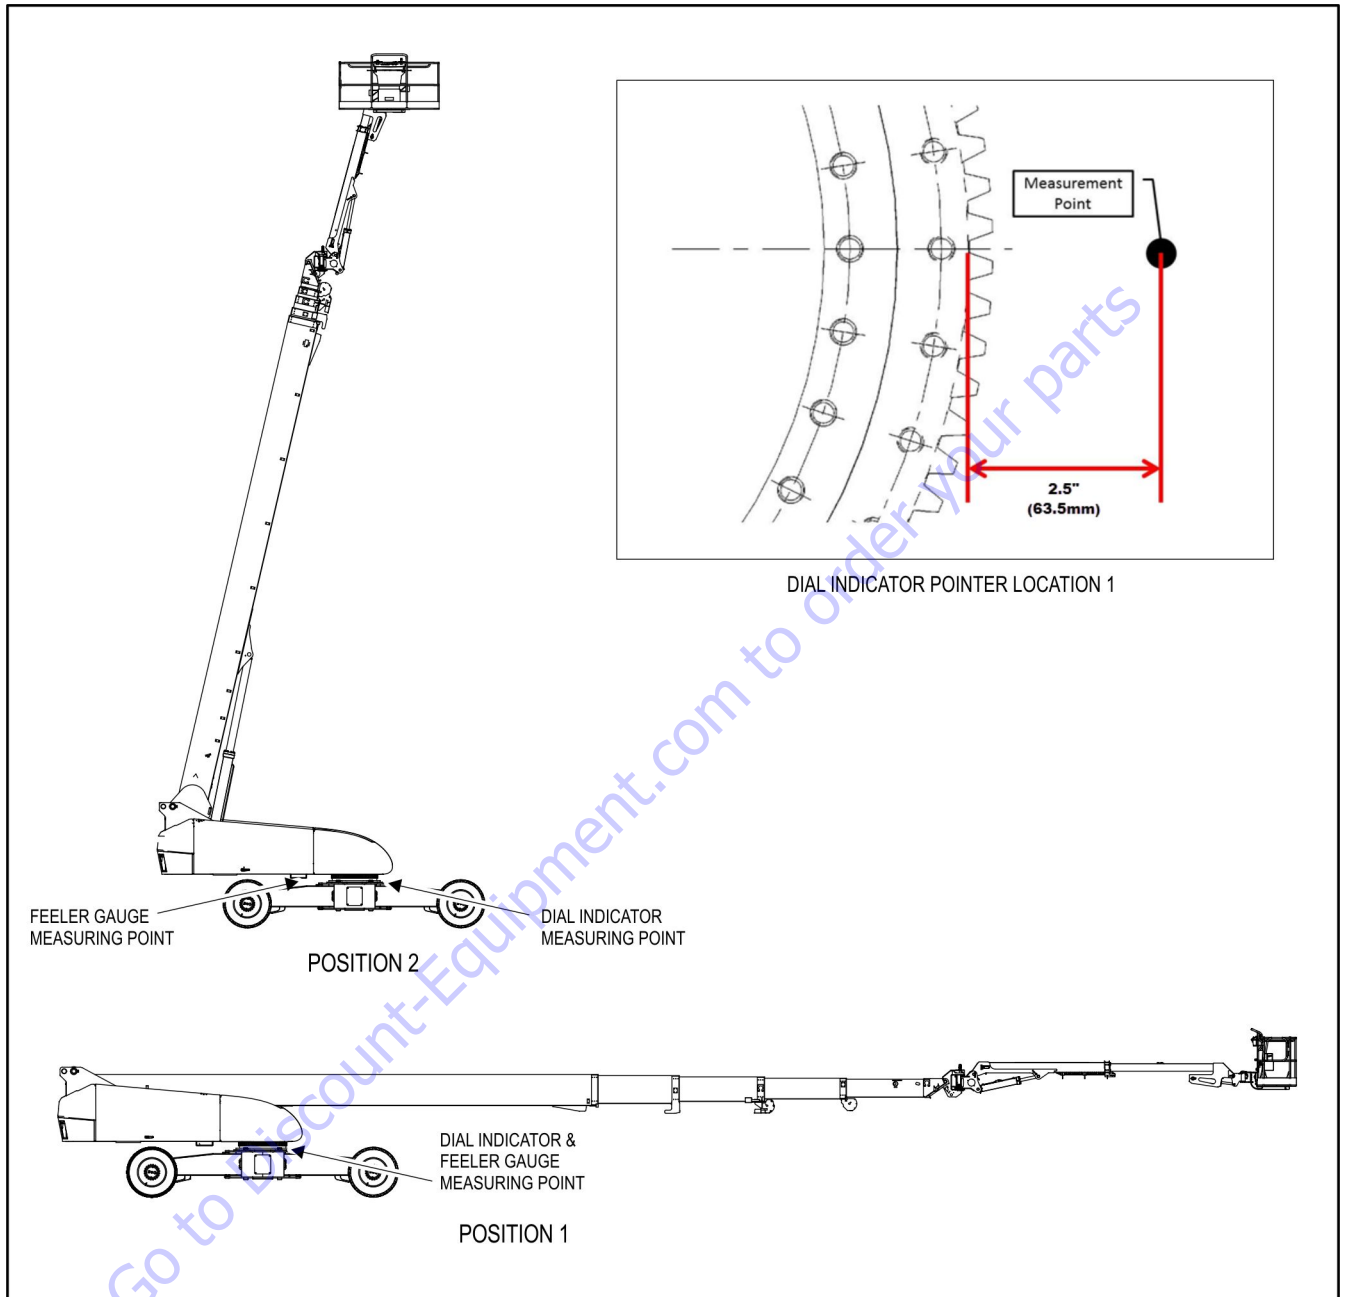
Swing Bearing Wear Tolerance
